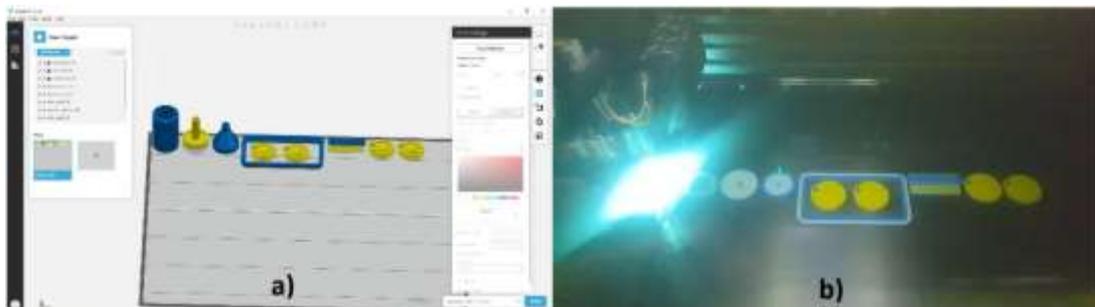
Master patterns being manufactured on the Stratasys J750 machine: a) print layout of components; b) 3D printing with Material Jetting
